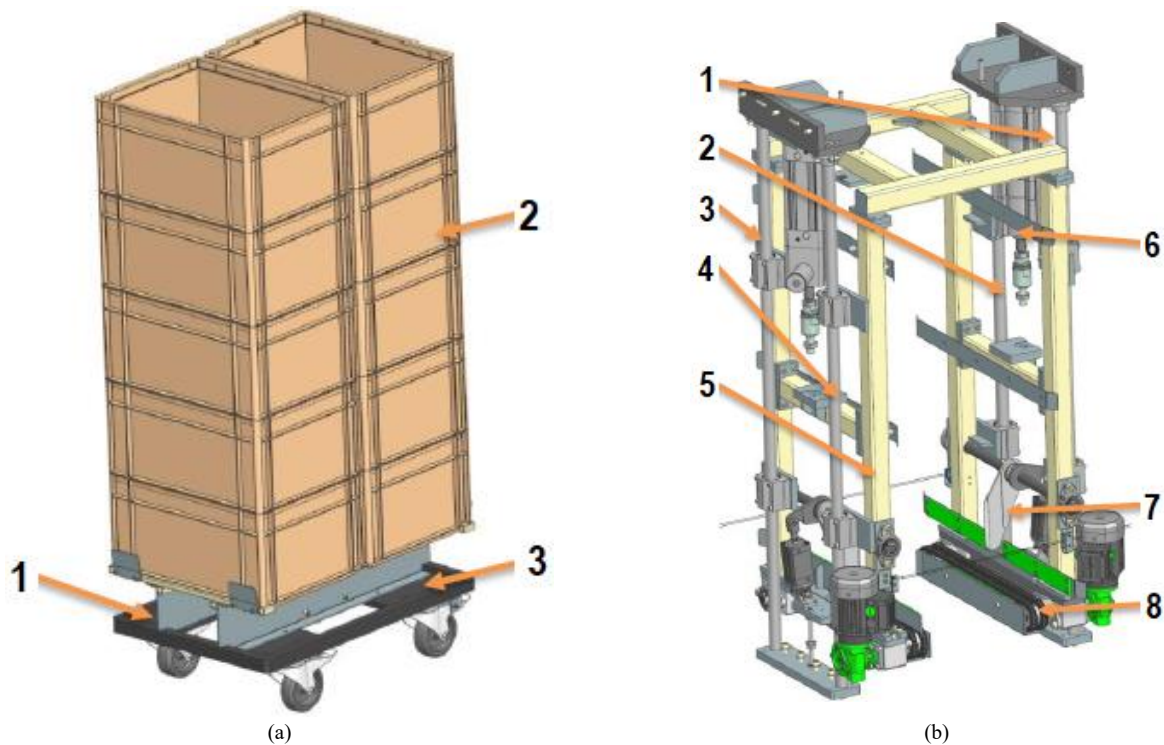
Turbocharged crate trolley: (a) 1 – Dolly Type II 600 × 400 mm, 2 – crates, 3 – trolley superstructure; and the loading mechanism (b) 1, 2, 3, 4 – linear guides, 5 – frame, 6 – pneumatic cylinder, 7 – separation mechanism, 8 – chain conveyor.
